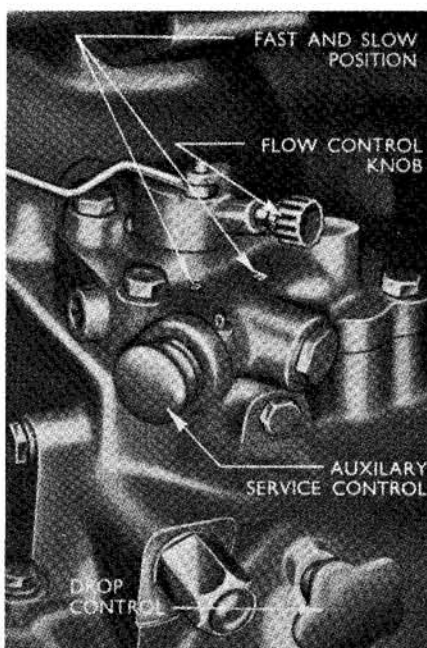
View showing location of drop control valve knob on model "New FSM". Refer also to Fig. 202.
